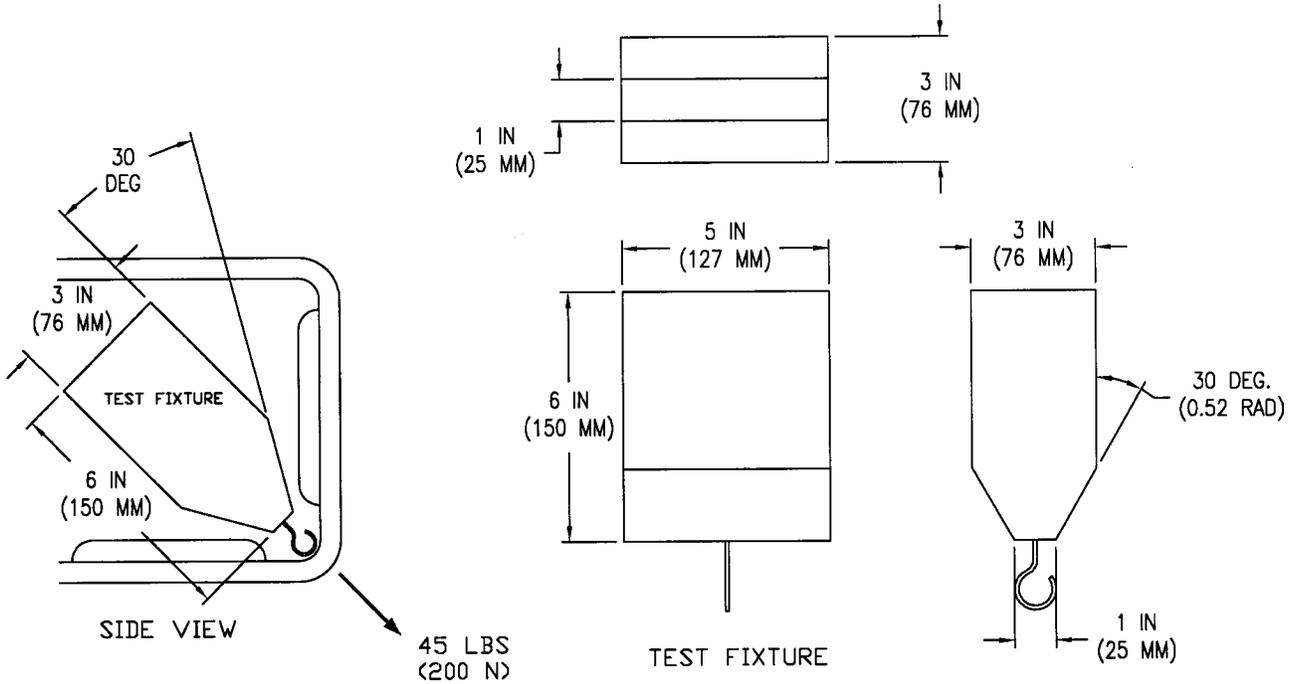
Test Fixture for Multiple-Occupancy Swings
